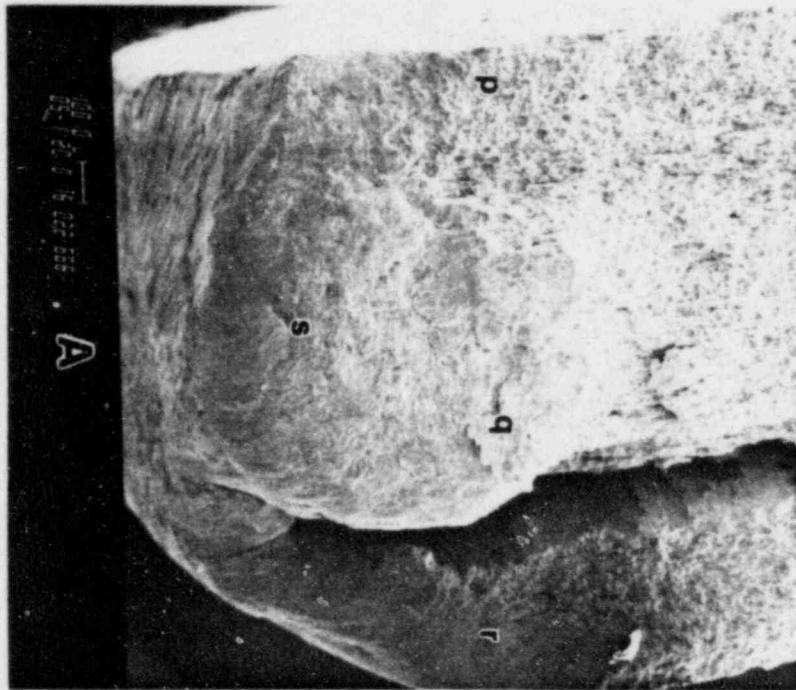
SEM Fractograph of the Largest Impact Area, Area "A" and Secondary Cracking shown in Figure 35.
